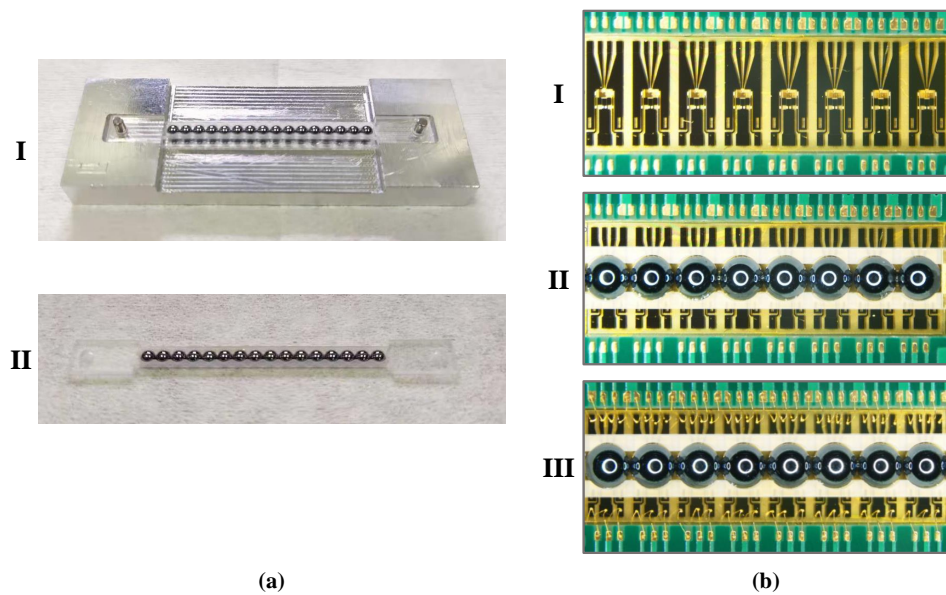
(a) Details of the assembly for silicon lens array. (b) Details of the assembly for TeraLDAs and silicon lens array (8-pixel of the whole array).
